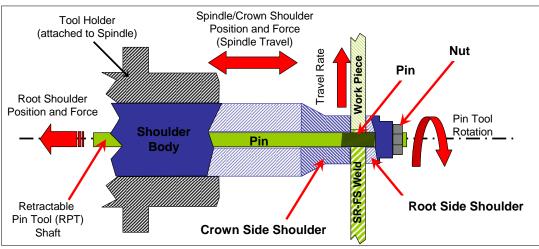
Self Reacting-Friction Stir Welding Process
